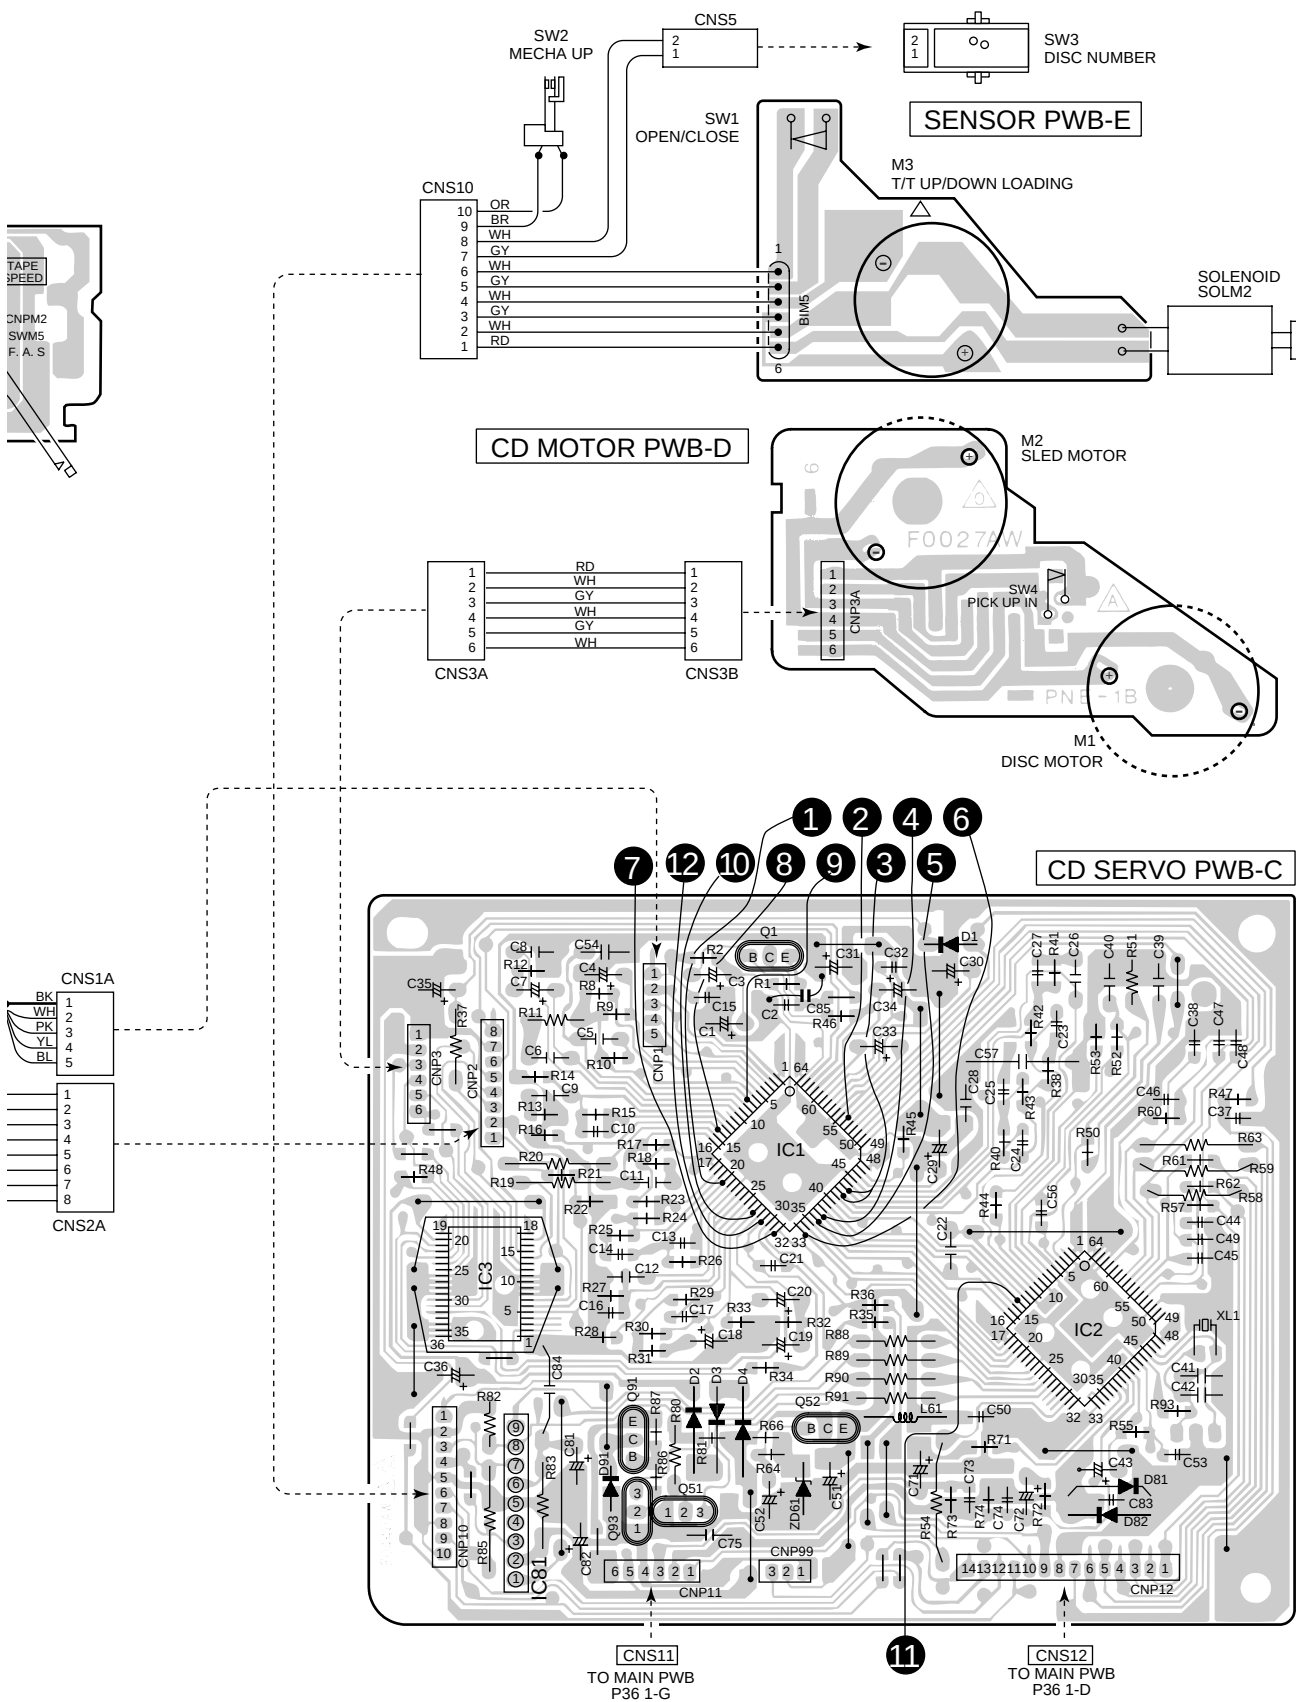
WIRING SIDE OF P.W.BOARD (4/8)
